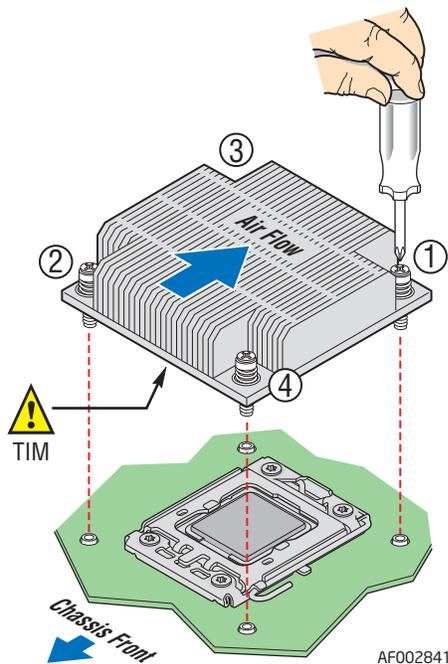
Installing the Heatsink (Passive Heatsink Shown)
